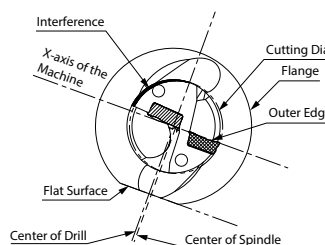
Excessive Offset (For Smaller Hole Diameter)
